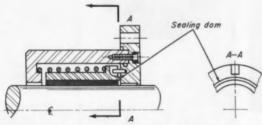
Floating bushing seal limits clearance between shaft and stationary parts to seal. Because it floats, it will accommodate eccentricity and runout, but length limits allowable misalignment of shaft and housing bore.
